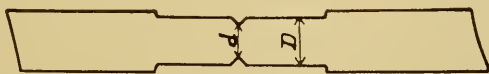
FORM OF IMPACT TESTING SPECIMEN
